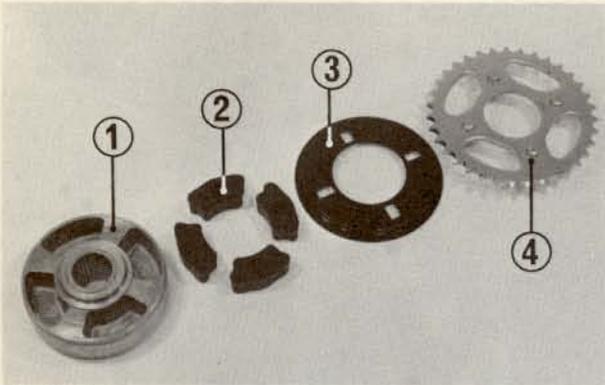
(1) Damper case (2) Sprocket damper (3) Damper cover (4) Driven sprocket
